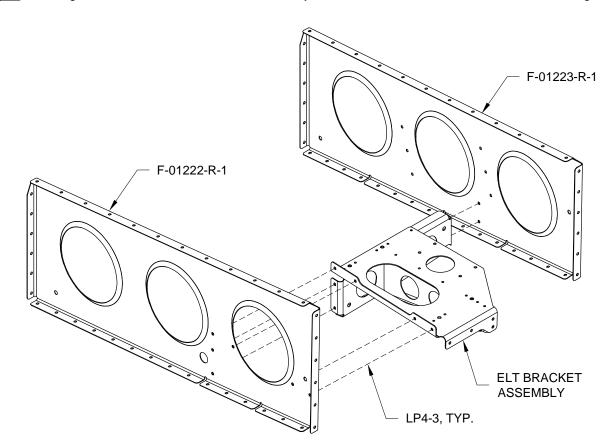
RIVETING ELT BRACKET/ BAGGAGE RIBS
